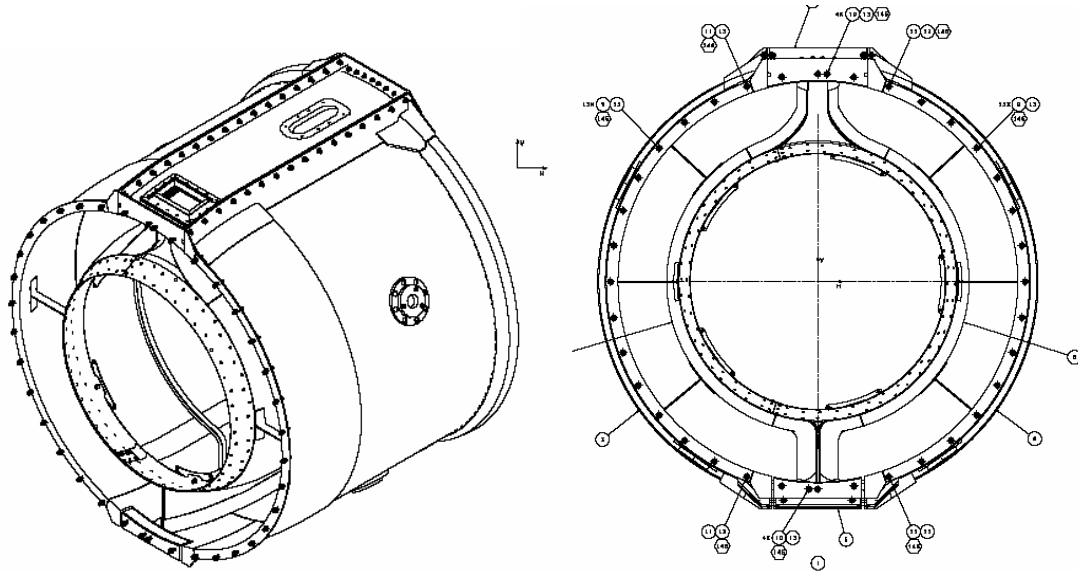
Preliminary Drawing Of Spool Piece For Inlet Internal Phased Array.
